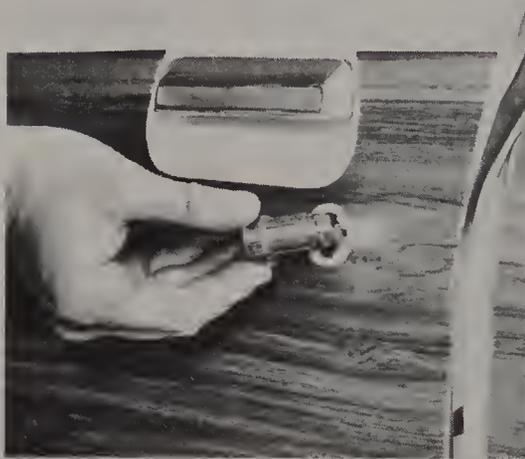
Detach the lower linkage (arrow) from the latch rod holder (Sec 13)
